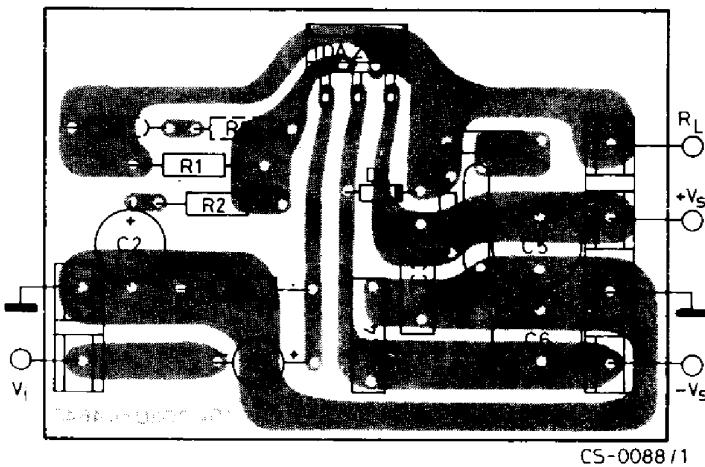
P.C. board and component layout for the circuit of fig. 13 (1:1 scale)
